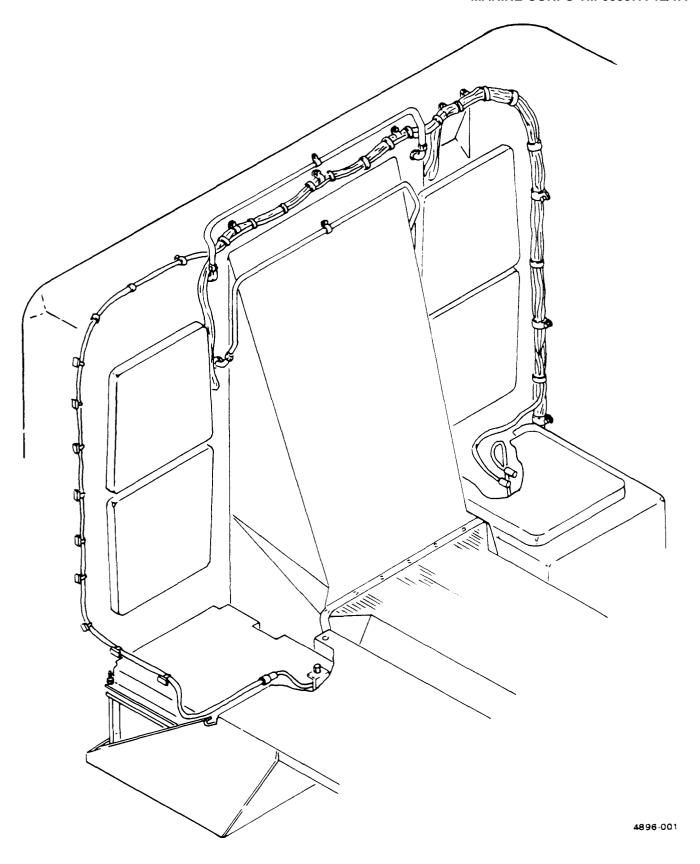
Example of Cable Tiedown Installation on SUSV
